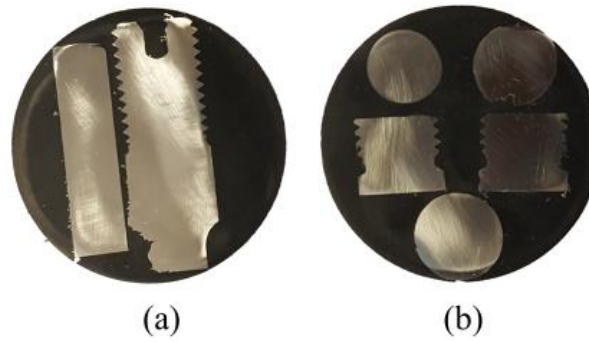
Ruptured creep specimen, sectioned to analyse the temperature and load effects on the (a) longitudinal section of the threaded-end and reduced section of the specimen and (b) transverse section of the specimen threaded-end
